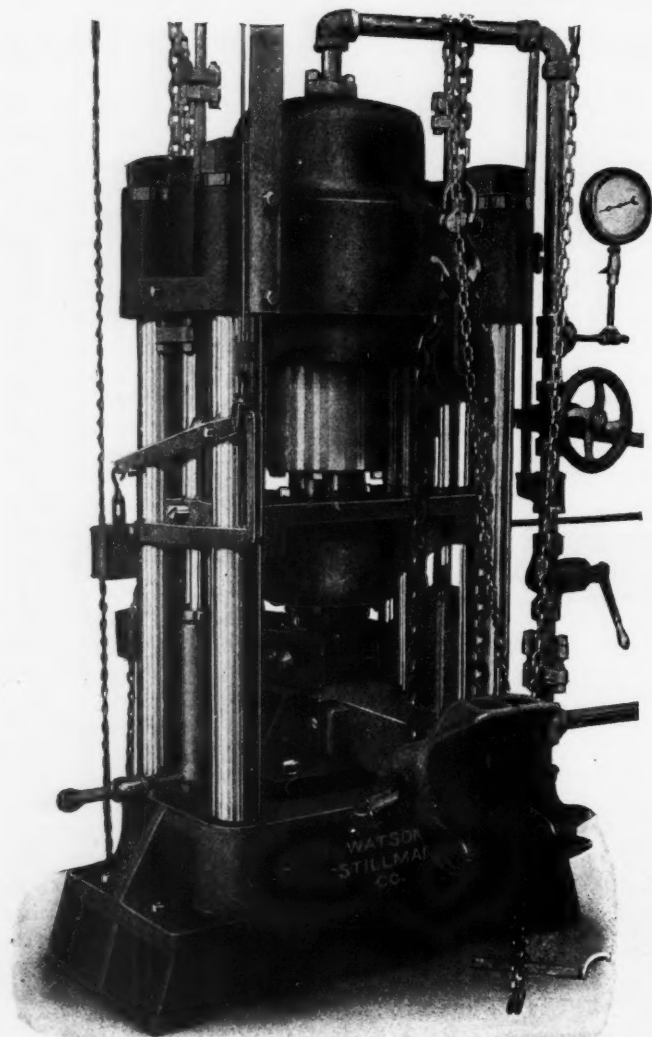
Watson-Stillman Shearing and Riveting Press—View showing Coupler sheared from Yoke
